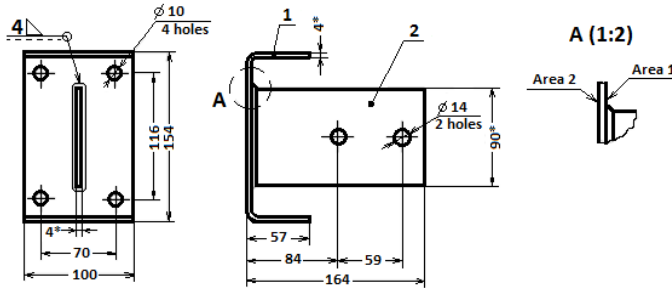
Crossbeam to longeron T-type welded joint from 93571 ODAZ trailer chassis frame (1 – crossbeam; 2 – longeron) acc. [14]
